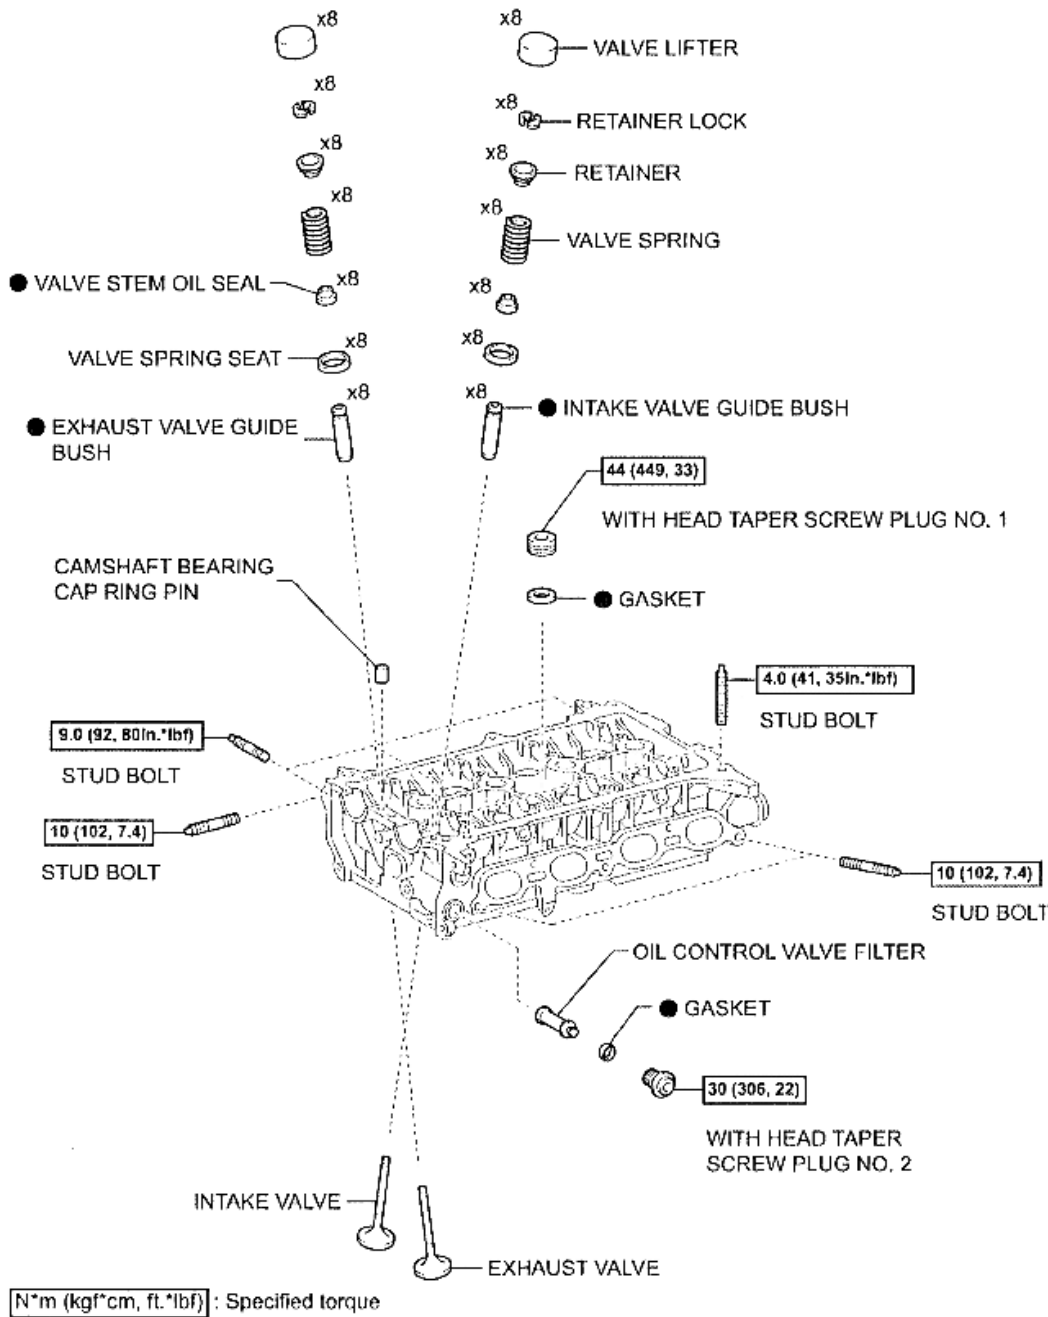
Identifying Camshaft Timing Oil Control Valve Assembly Components With Torque Specifications (20 Of 20)
